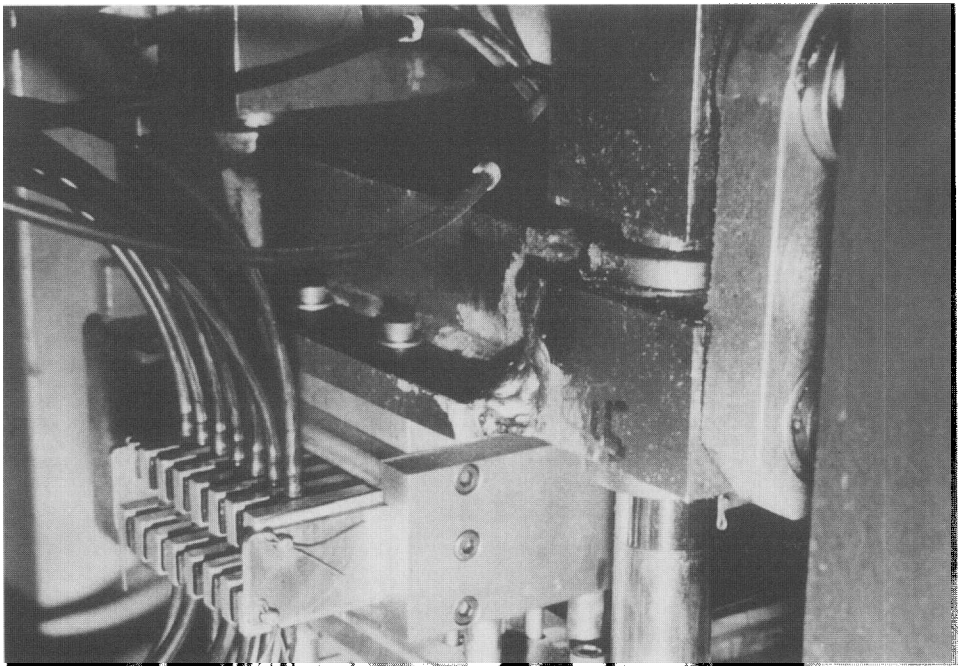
Fracture in cross head on earlier machine. Fracture can be seen close to linear bearing at right-hand side; air lines to cylinder at left.
